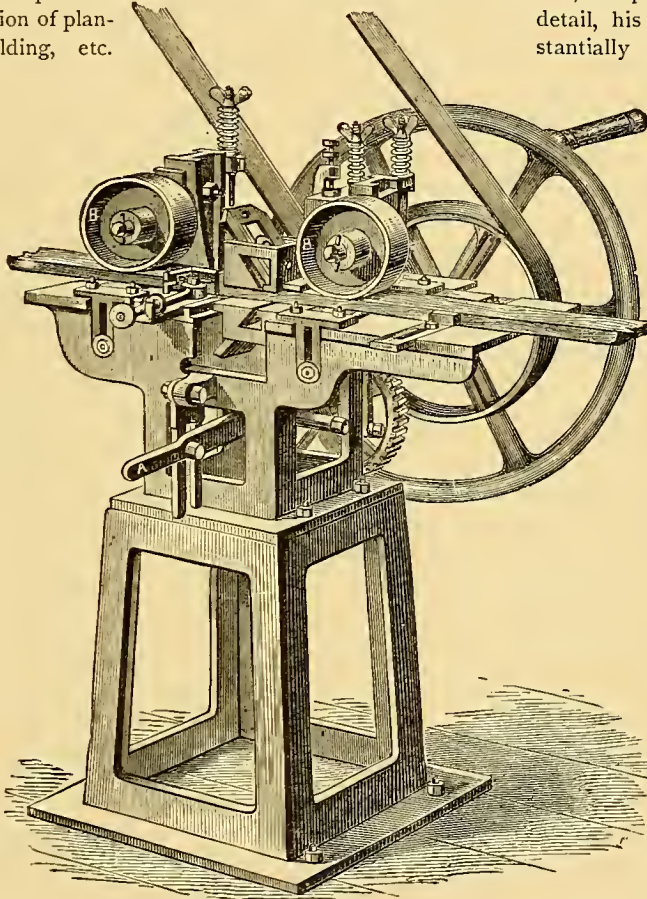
SHILL'S PATENT HAND OR STEAM-POWER PLANING MACHINE.
